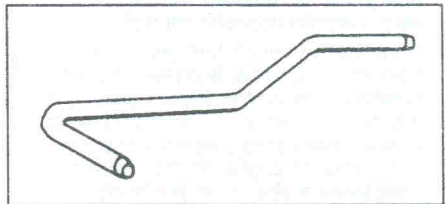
The special rod (Tool No. 7014-T.J.) is used to lock the crankshaft in the timing position. A removed engine facilitates the operation.
